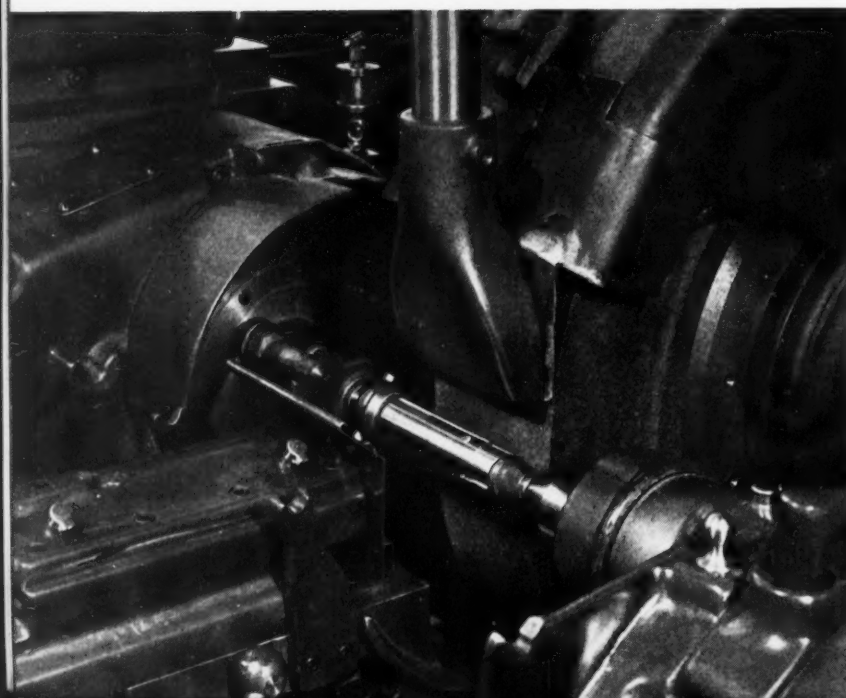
Grinding Cheeks of Double-throw Radial Engine Crankshaft
